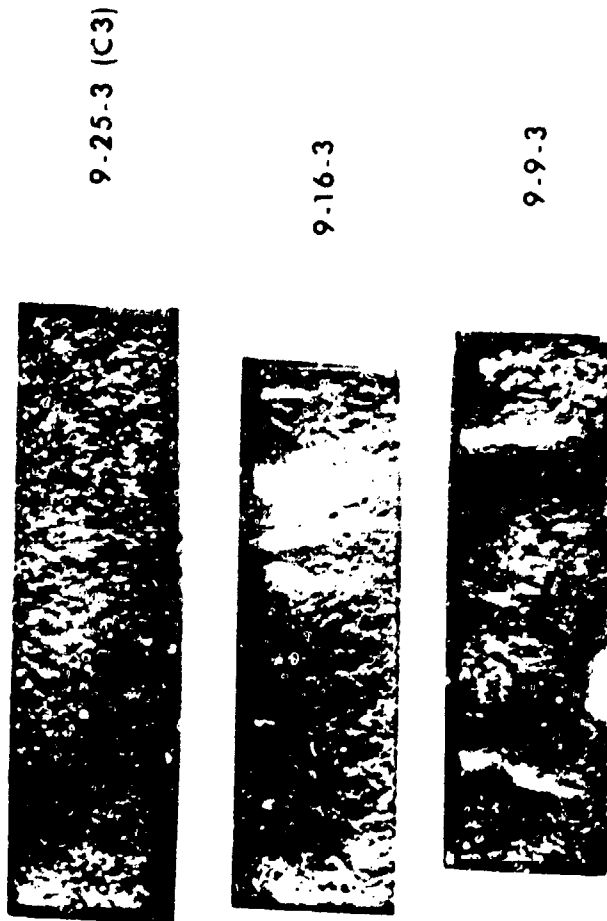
Fracture Surfaces of the Salt Fog Exposure Specimens of Figure 50, With DOW 7 Coating.
